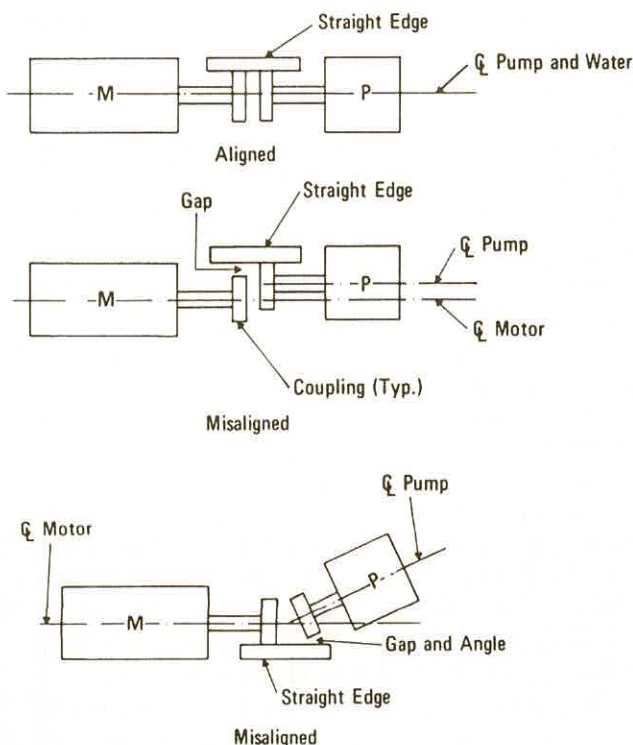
COUPLING ALIGNMENT WITH STRAIGHT EDGE
